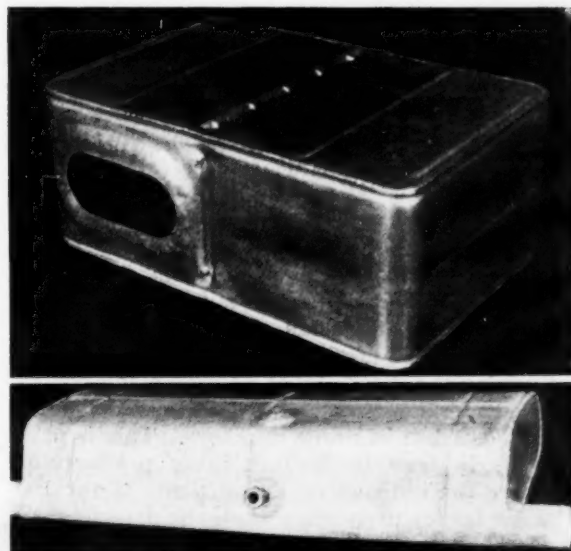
(above)—Rectangular tank, 25 in. long. Fig. 15—Special shape tank, 27 in. long
